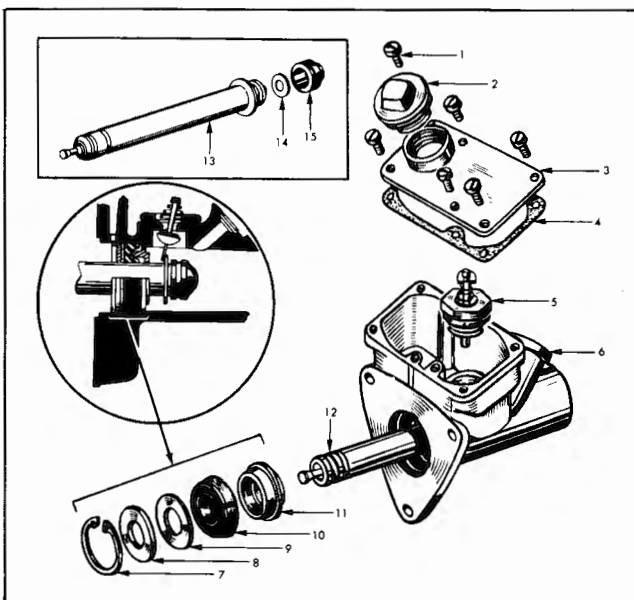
Removal of Plunger Seal, Plate and Valve Cover
